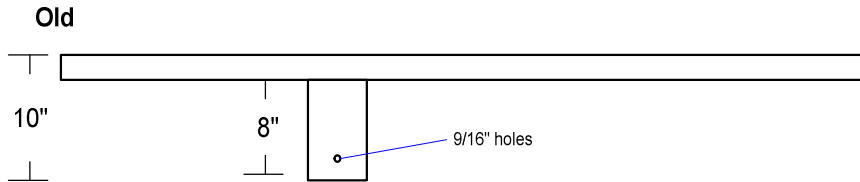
Design Specifications of Non-Welded Brush Bar Mounts for Horizontal Cable Braces
